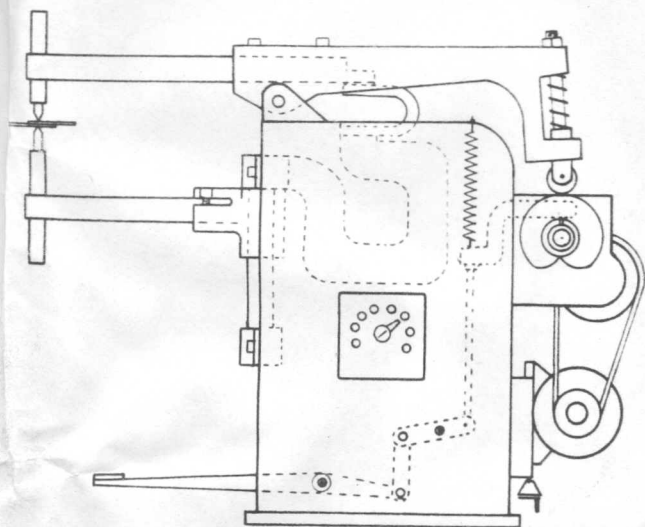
Motor-operated rocker-arm spot-welding machine. (Redrawn by permission from American Welding Society. *Welding Handbook*, 6th ed., 1970, section 2, p. 28.7.)
